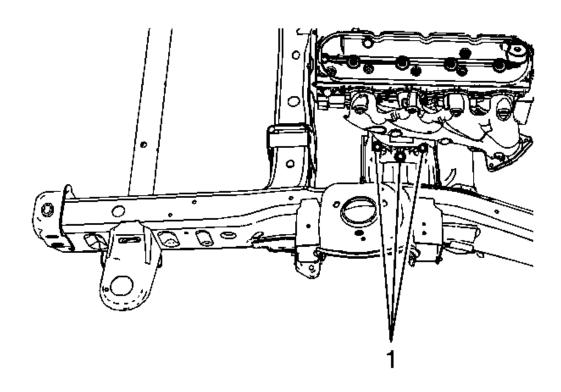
View Of Engine Mount To Frame Bolts Courtesy of GENERAL MOTORS CORP.
